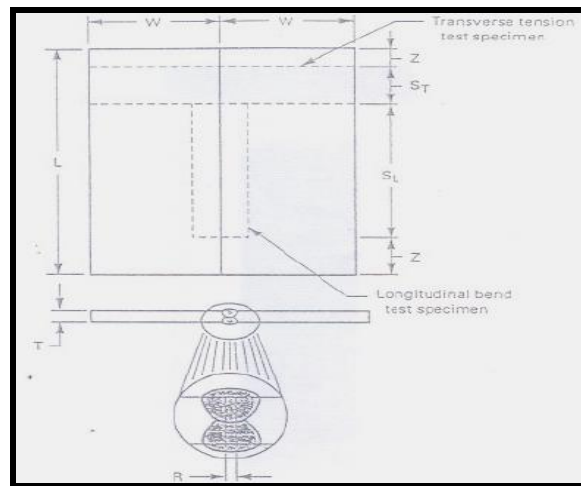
Schematic location of test pieces in a butt-weld assembly.
